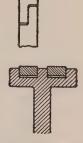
Piston RING WITH OVER-LAPPED JOINT.
